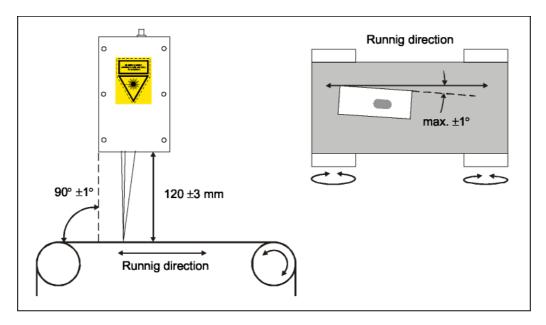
Mounting tolerances and alignment of μSPEED-smartsensor
